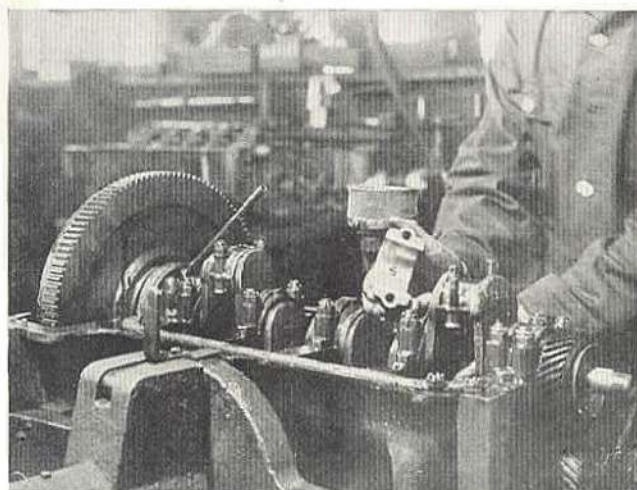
Removing Connecting Rods. Hold rod in position when backing off nuts and removing cap.
